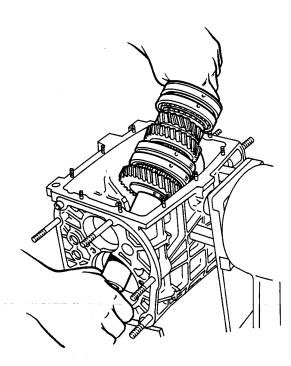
Removing Main Shaft from Gearbox Housing
